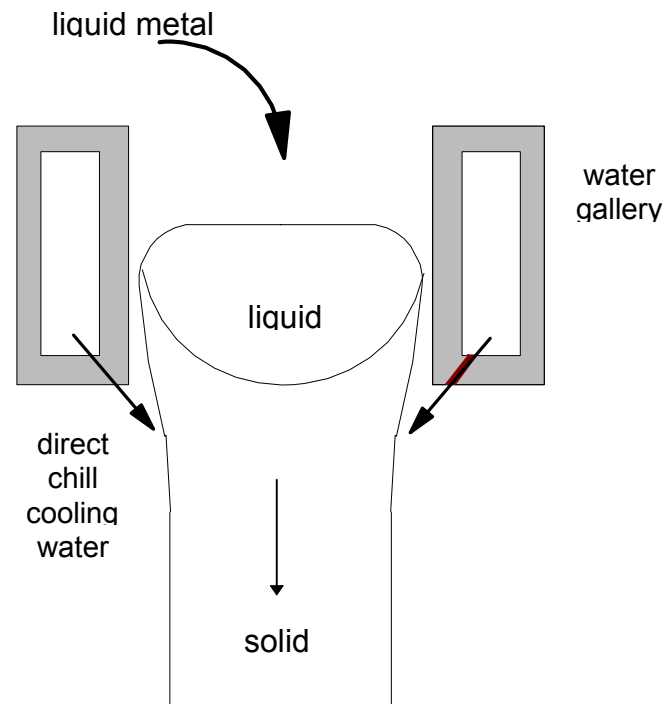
Schematic of the basic DC process. The solid moves out of the mould, liquid is fed into the mould opening and is contained by the water cooled mould, the direct chill water spray cools the ingot as it emerges, extracting enough heat for the solid shell to form above the spray inside the mould and contain the liquid.
